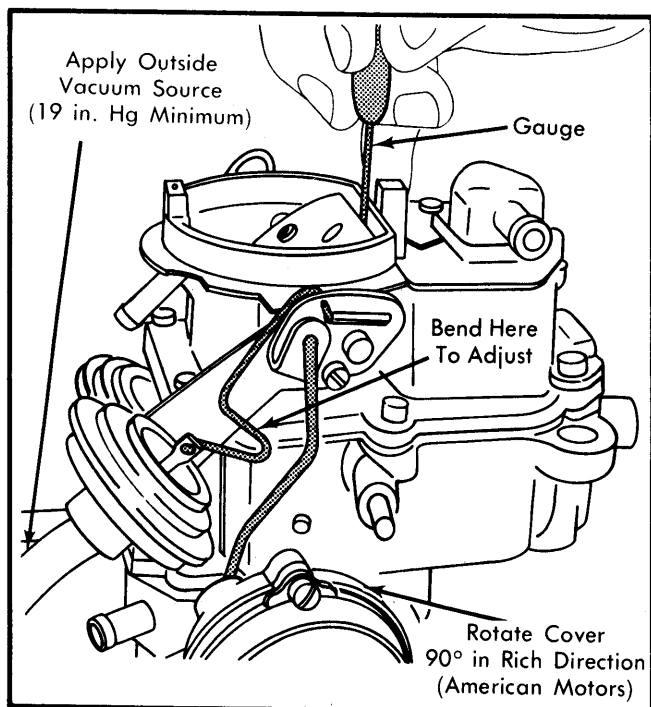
Adjusting Choke Vacuum Break (Initial Choke Valve Clearance)
